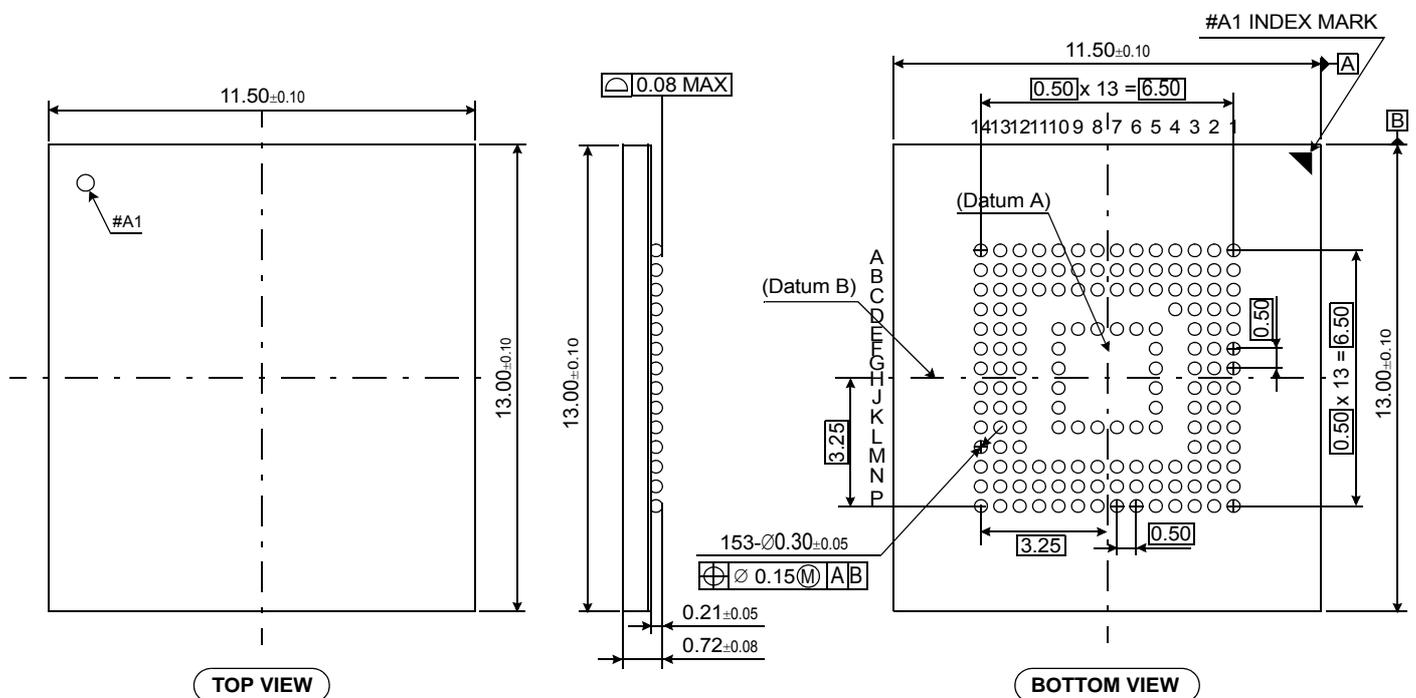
11.5mm x 13mm x 0.8mm Package Dimension
